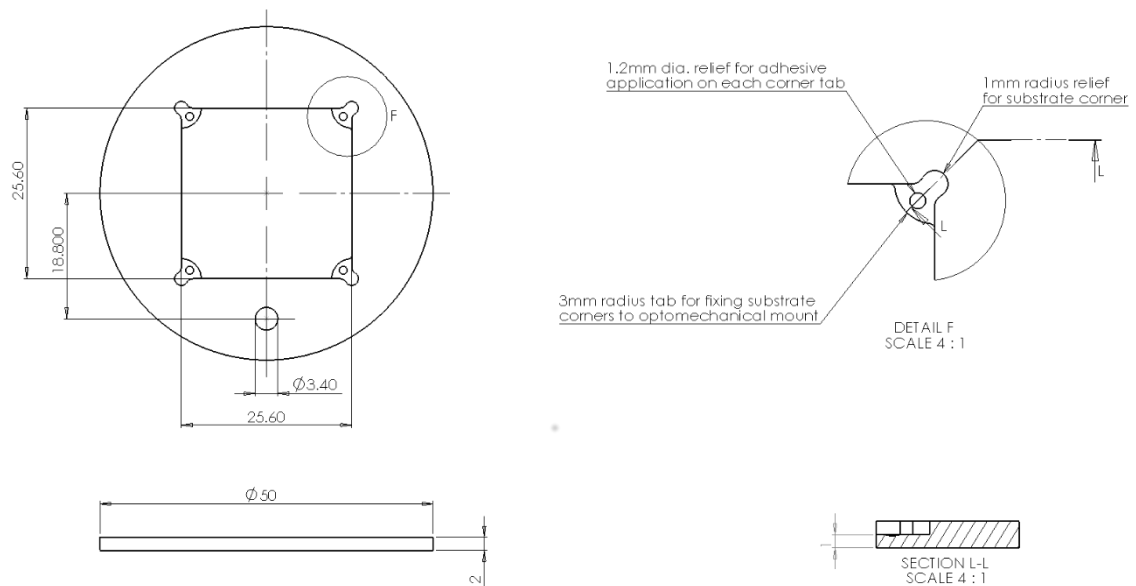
A mechanical drawing of the LightForge optomechanical mount detailing the main features.
